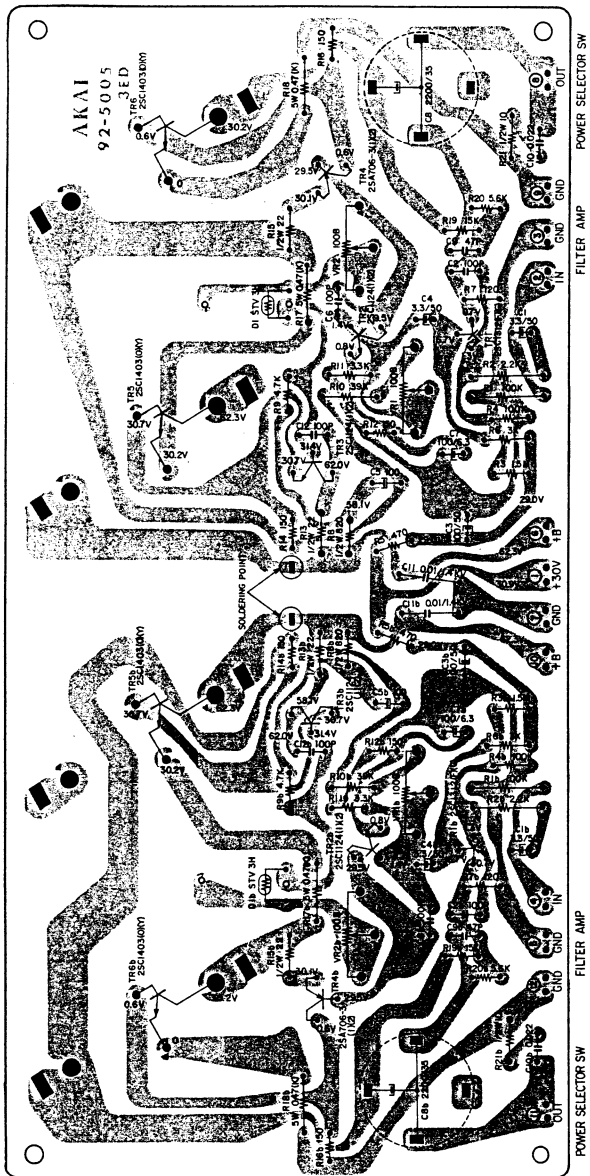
POWER AMP. P.C. BOARD 92-5005 (Reverse)
